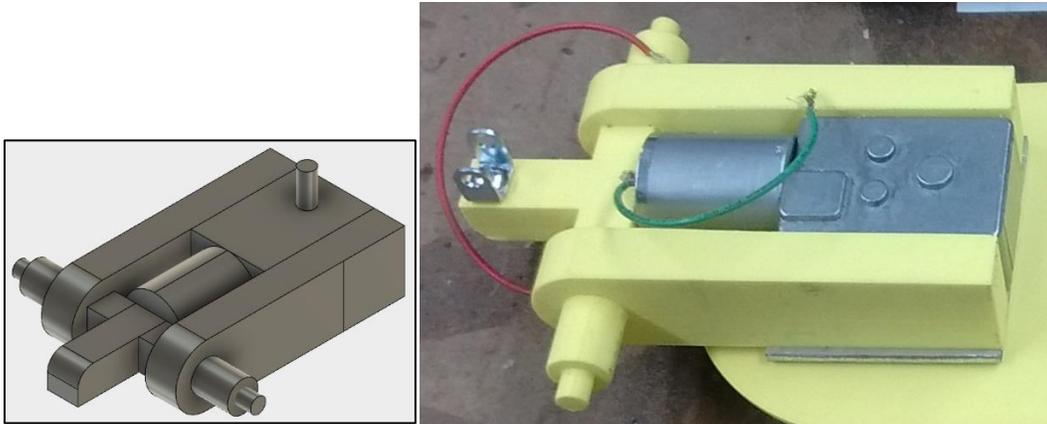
Righting Mechanism with Motor Model (left) and Assembled (right)
